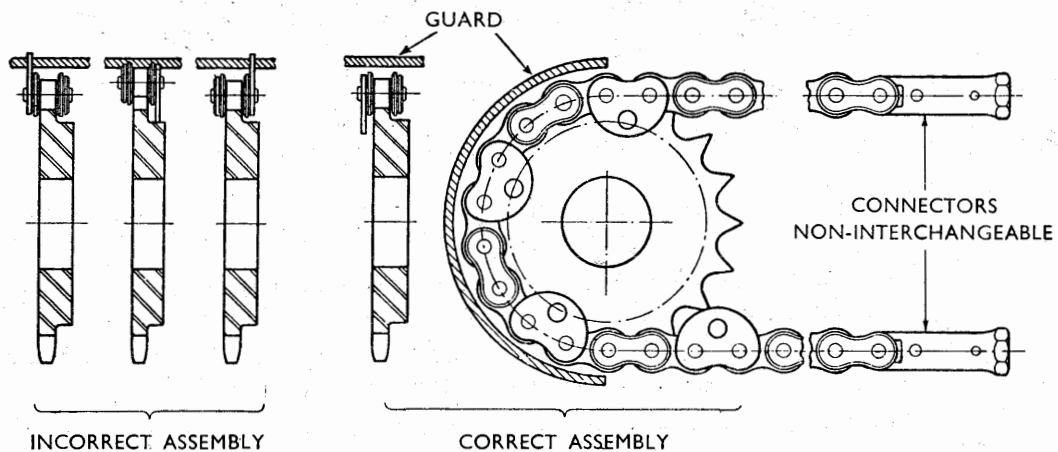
NON-REVERSIBLE CHAIN ASSEMBLY
